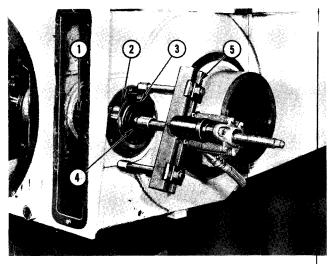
PULLING PINION 1. Inner Bearing Cone 4. Pinion Shaft Outer Bearing Cup 5.
